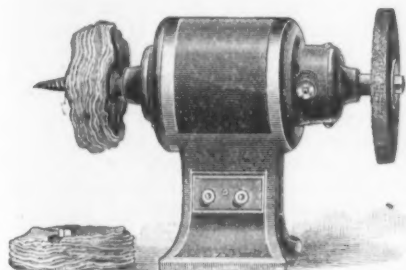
Emery and Buff Wheel Driven by Storey Motor.
